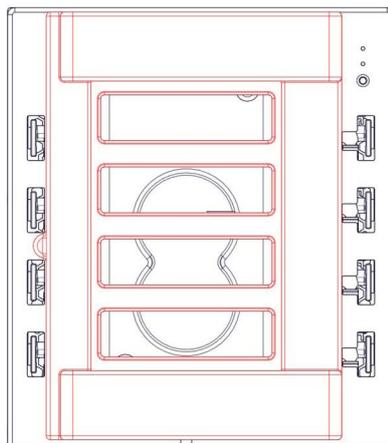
SCILA without drawer showing the front frame fixed by magnets
